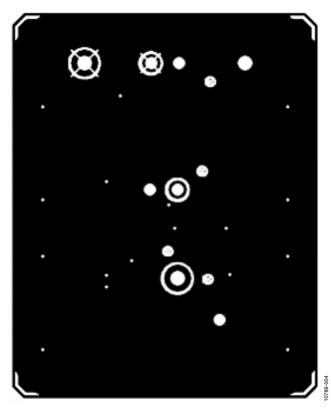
ADA4433-1BCP-EBZ Board Layout Pattern, Secondary Side
